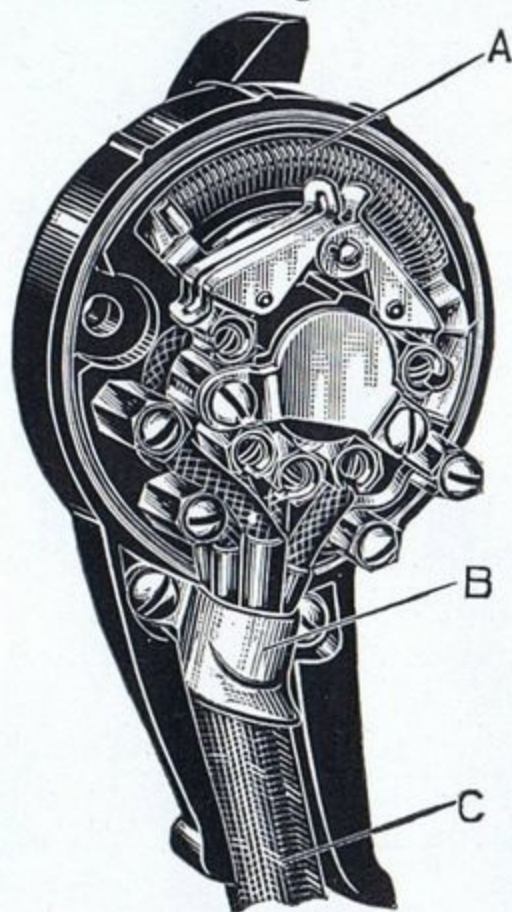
SWITCH REMOVED FROM BACK OF HEADLAMP.
